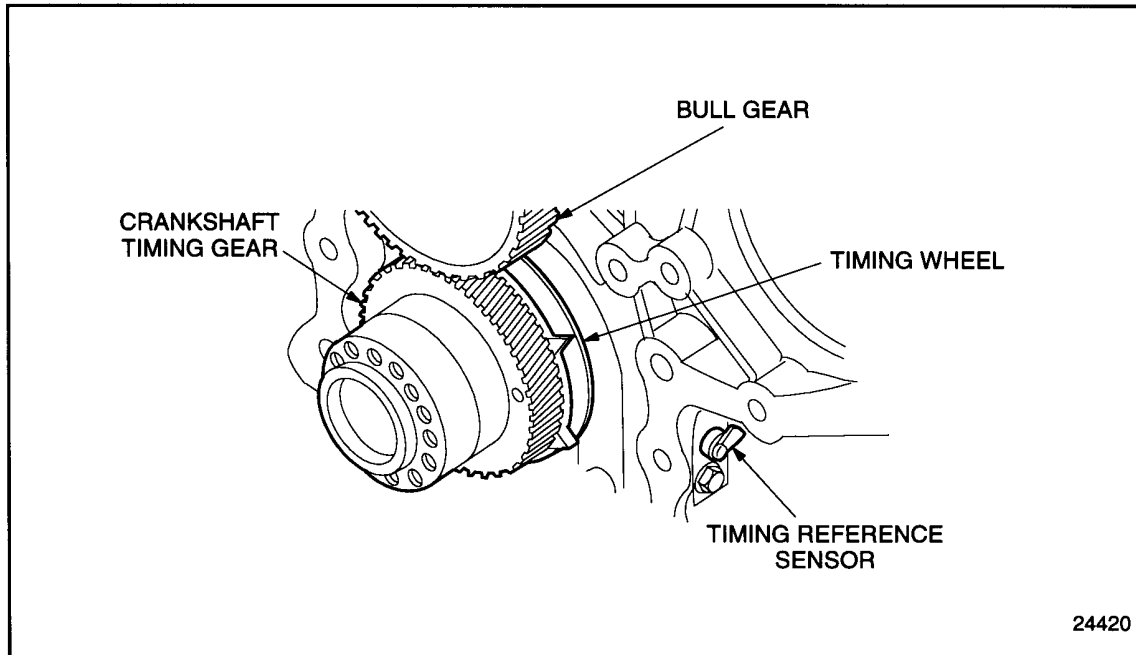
Crankshaft Timing Gear and Related Parts Location
